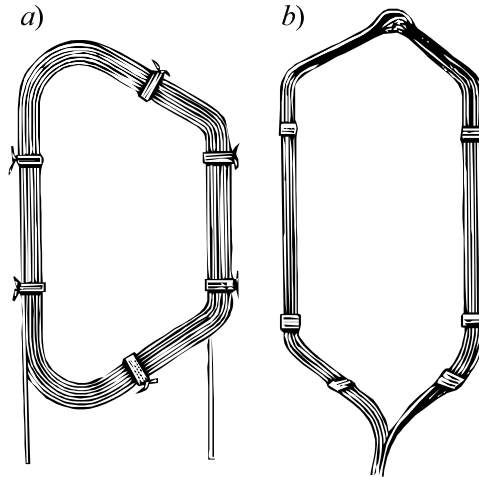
Coils of single layer (a) and two layer (b) windings
